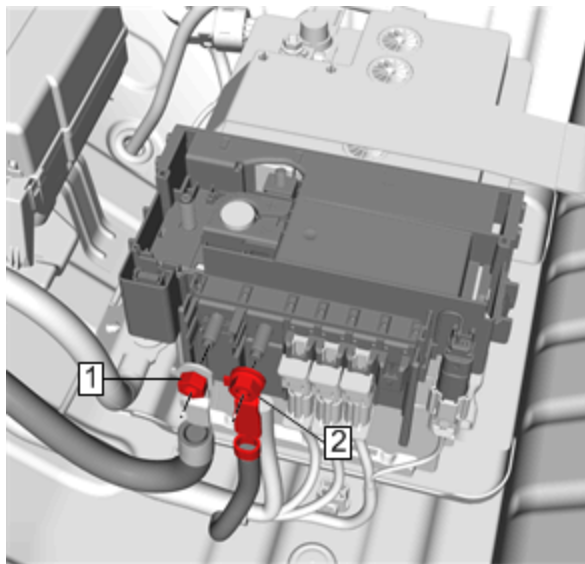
Battery Positive Cable Junction Block Nut And Body Wiring Harness Nut
